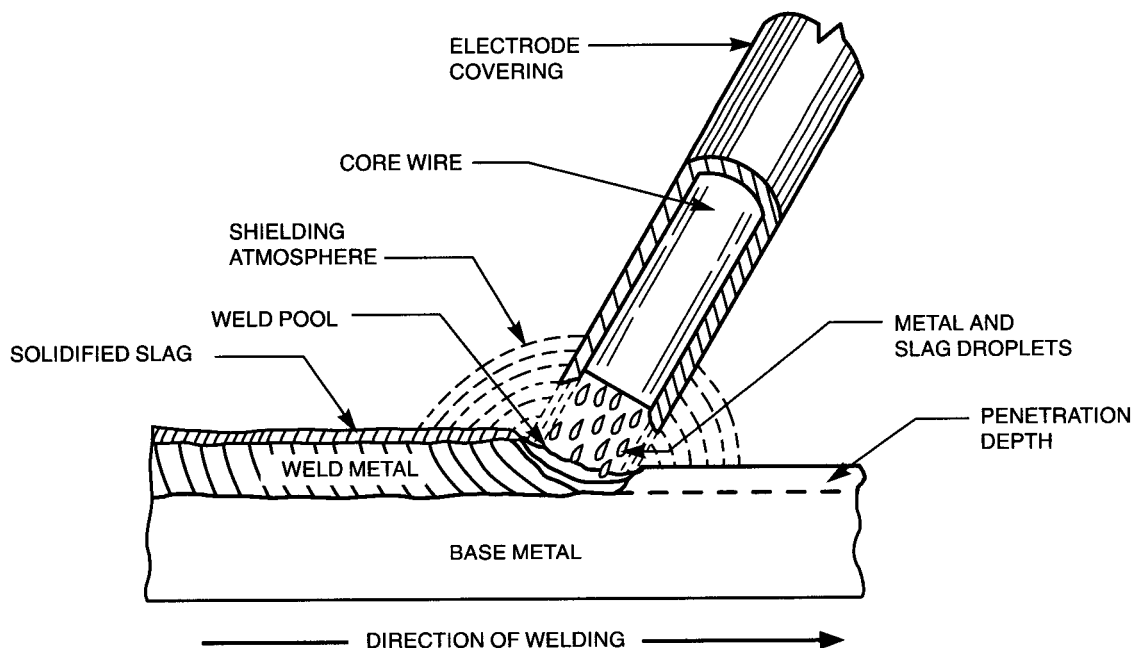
Schematic View of Shielded Metal Arc Welding
